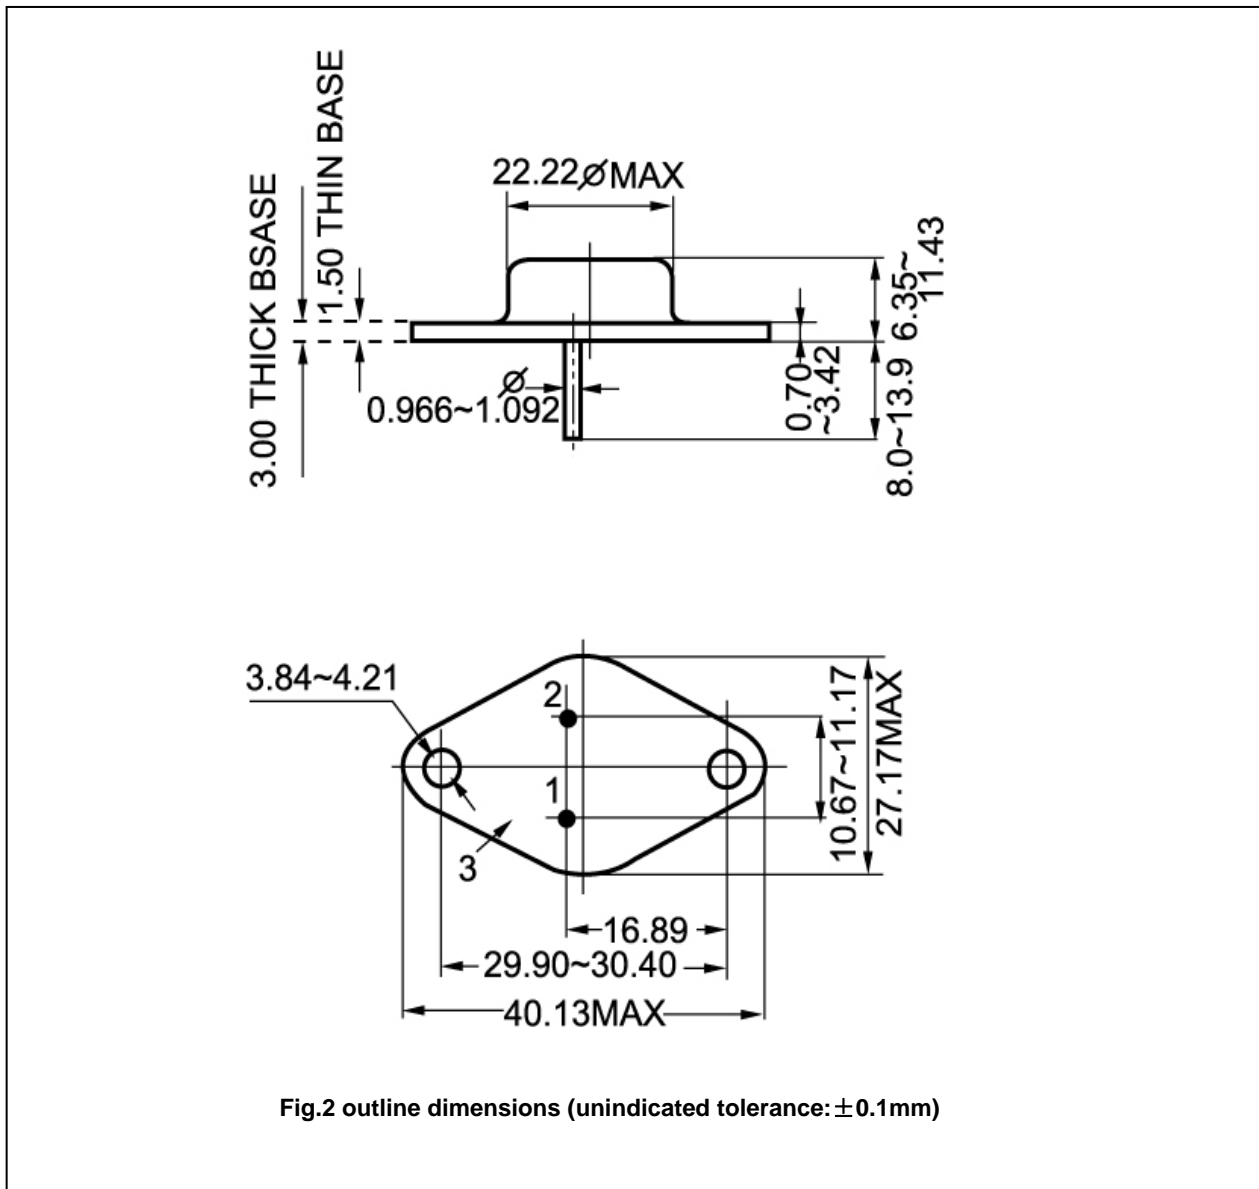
outline dimensions (unindicated tolerance: ±0.1mm)
